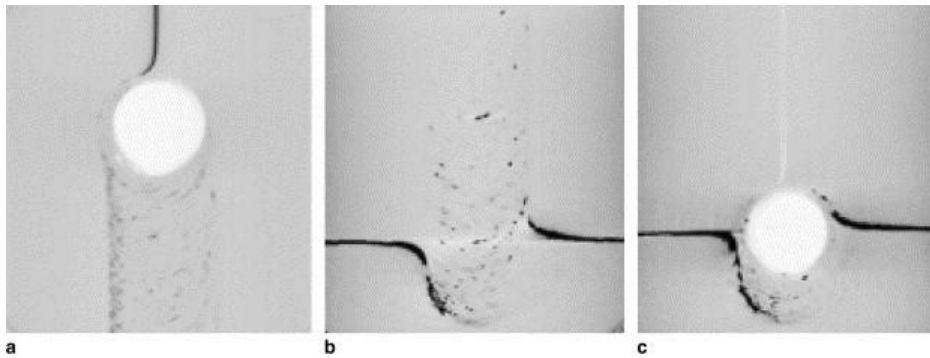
2D CT images of tracer material at weld mid-plane: (a) tracer is parallel to weld; (b) tracer is perpendicular to weld; (c) perpendicular tracer with weld stopped at the tracer line. [26]
